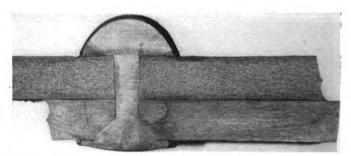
An etched cross-section of a riveted seam showing the sharp edges in the rivet hole
